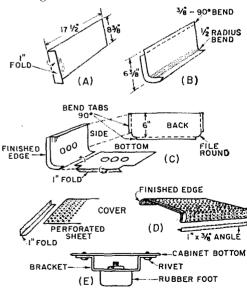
Bending details. A—Forming front edge of side piece. B—Rounding bottom of side piece. C—Joining of side, back and bottom pieces. D—Forming front edge for perforated cover from angle stock, and bending side ends of cover. E—Bracket for rubber-foot mounting.
